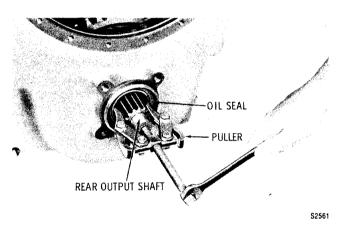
Removing rear output shaft oil seal (-1 models with output disconnect or with no front output)
